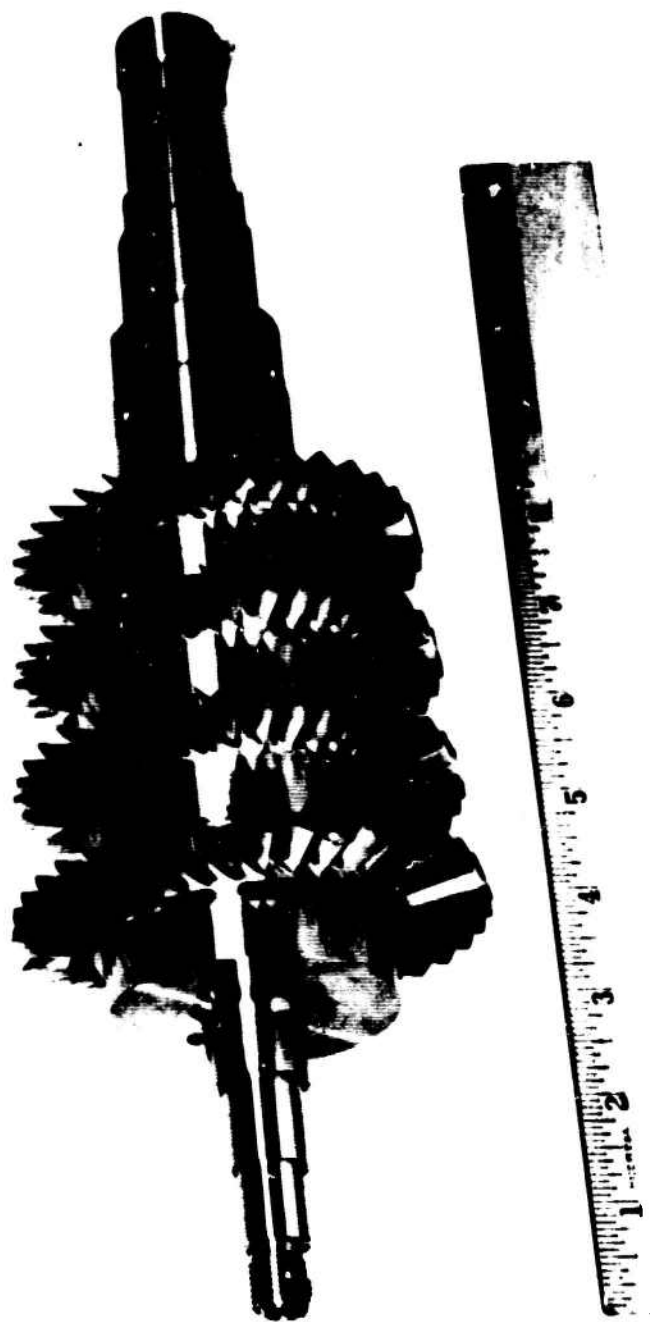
Four-Stage Axial Compressor Rotor Ready for Installation into the Compressor Test Rig.
